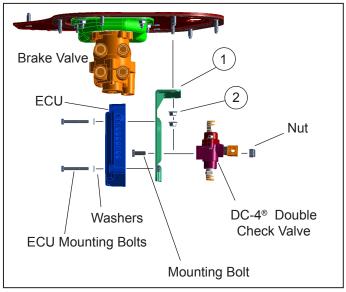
(Type B) Bracket with ECU and a DC-4 Double Check Valve
